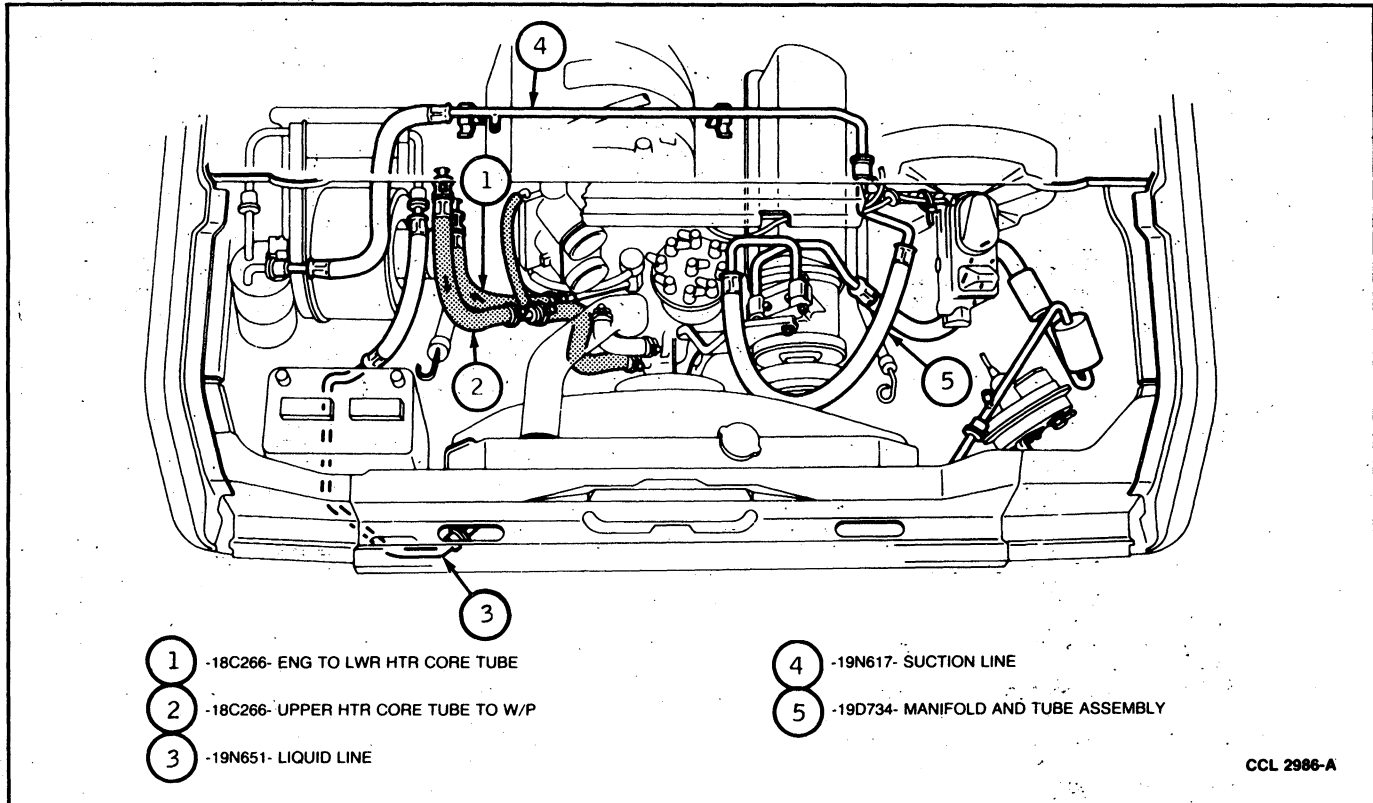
Heater Hose Installation—5.0L (302 CID) 8-Cylinder) Engine
